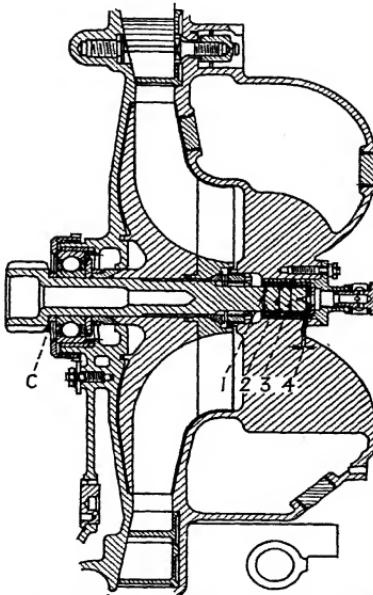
Section of supercharger. See fits and clearances in Table 1.
